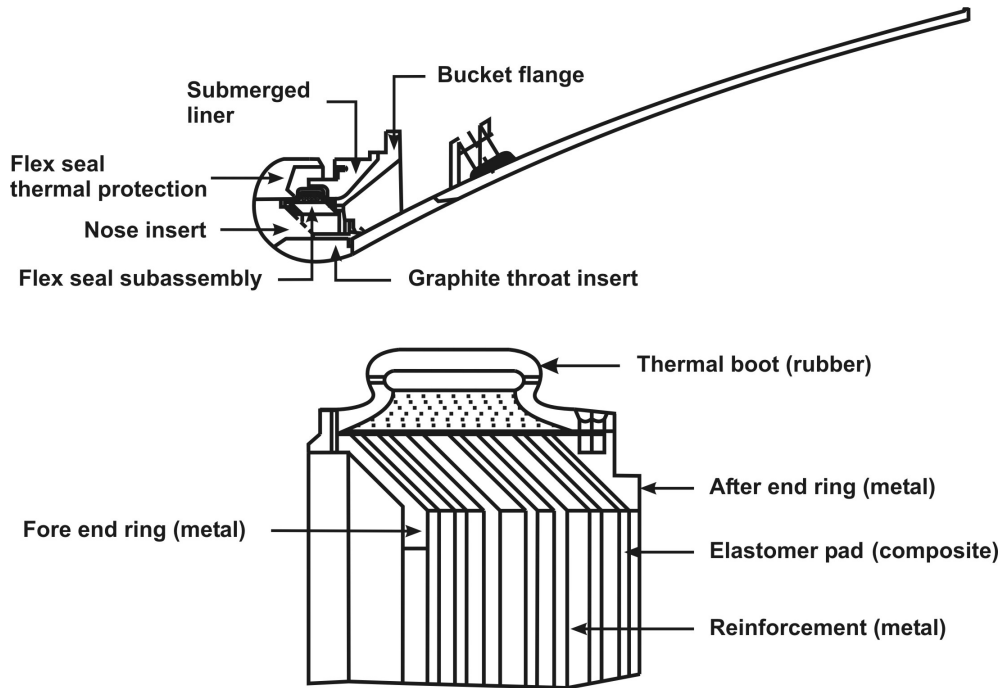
The details of a flexible nozzle; the critical component is the flexible element made of ply of metal sheets and silica phenolic composite
